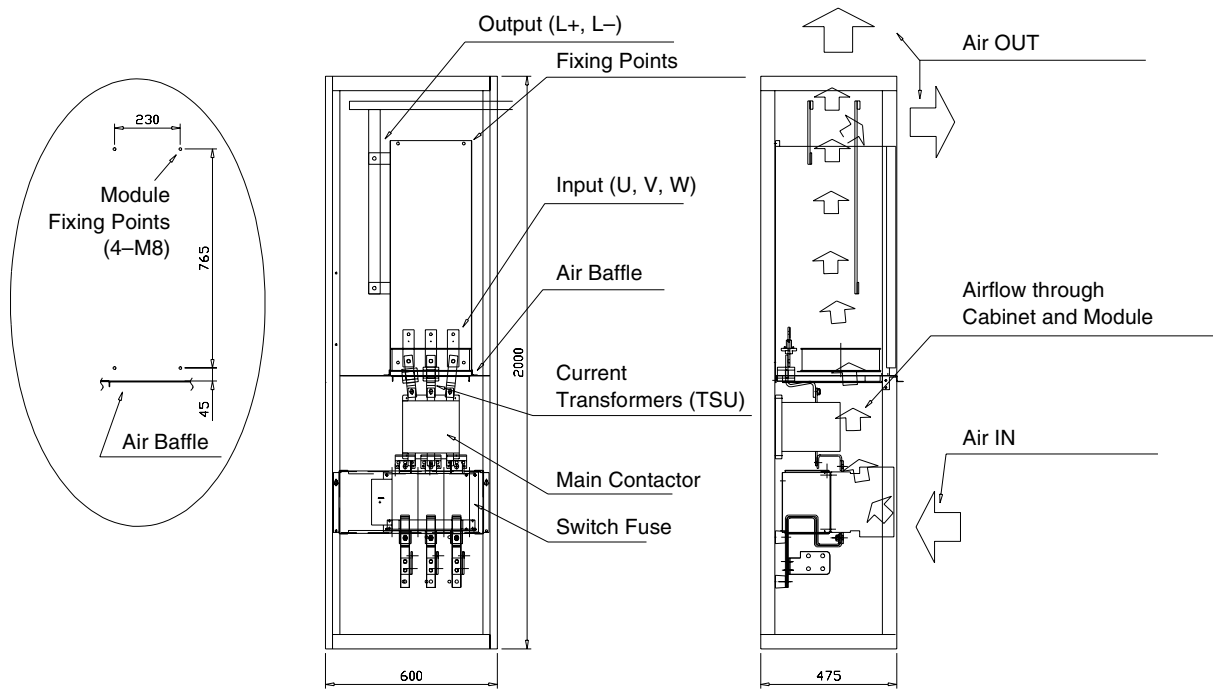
Cabinet layout example for Frame B3 supply unit.
